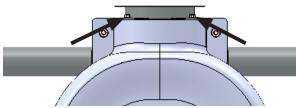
Fix front cover (2 screws on top & 1 screw on bottom)
